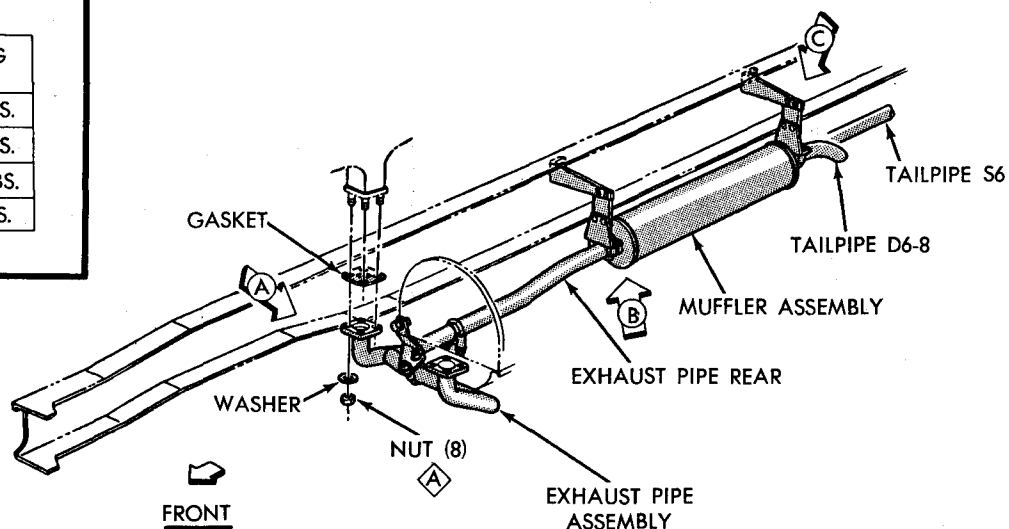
D600, 700, 800 and S600, 700 Exhaust System (361 and 413 Cubic Inch Engine)
